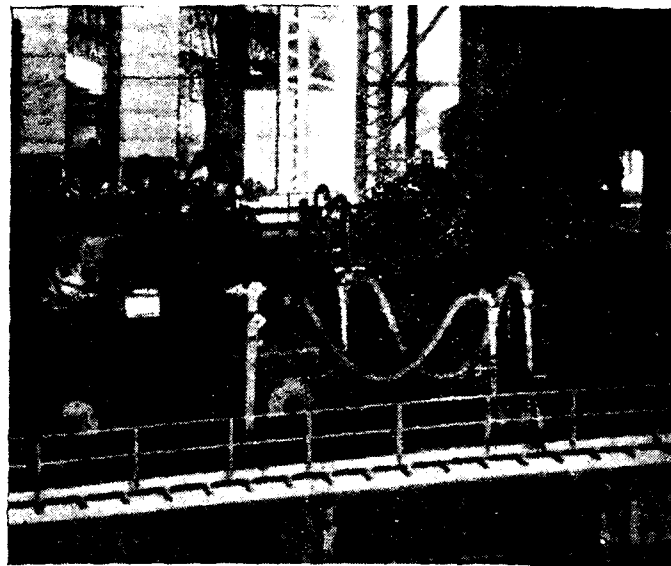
SPINNING MACHINES OF THE SPUN PIPE PLANT AT KUTLI WORKS, INDIAN IRON & STEEL CO.
